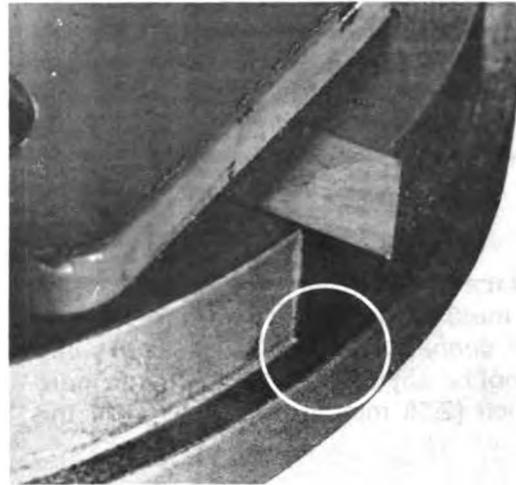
(V10195). The Cutting Tool Installed In The Cutter Plate.
